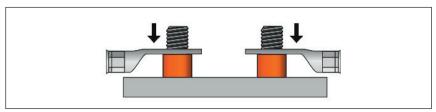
HV BM 1.2+S, power cable HV+, placing the ring terminals on the threaded bolts
